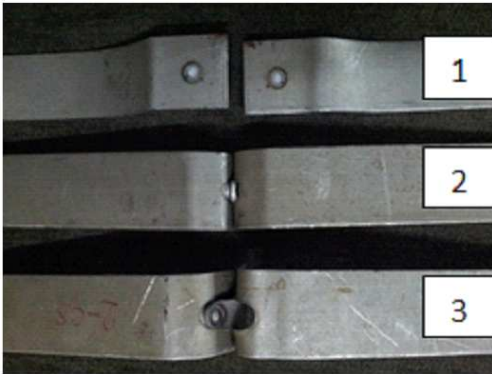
Breaking failure samples observed in tensile-shear tests and tensile-peel tests.
